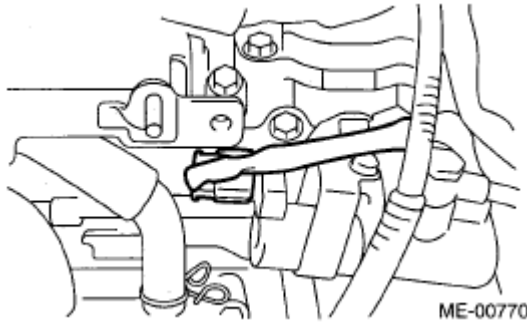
Identifying Oil Flow Control Solenoid Valve Connector
